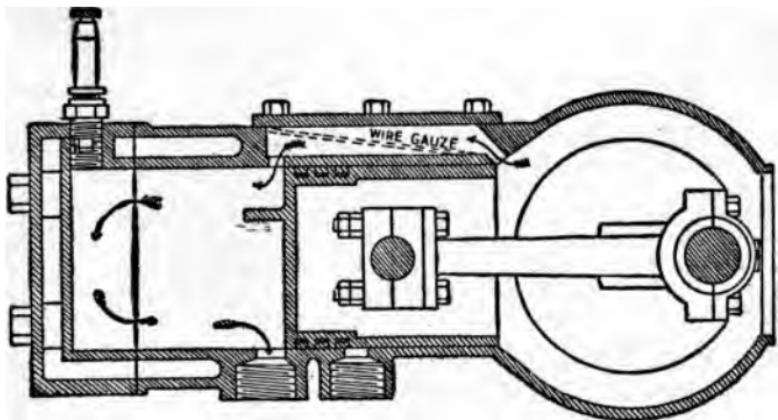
Section through cylinder of a three-port, 2-cycle engine, showing exhaust and transfer to the cylinder at crank center.
